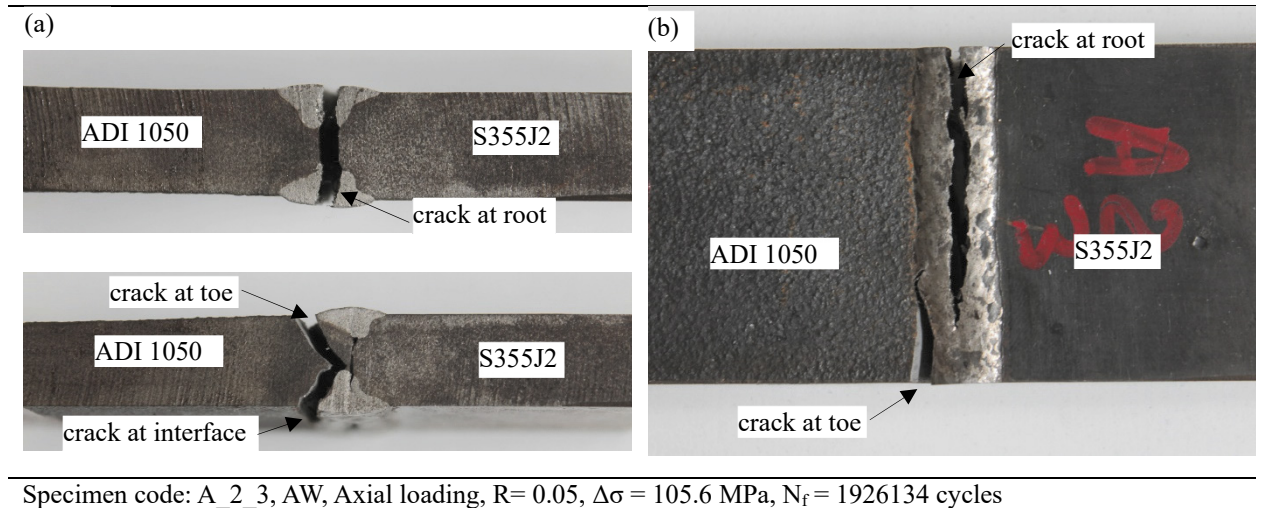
Fracture surfaces of partial-penetration butt-joints tested under axial fatigue loading.
